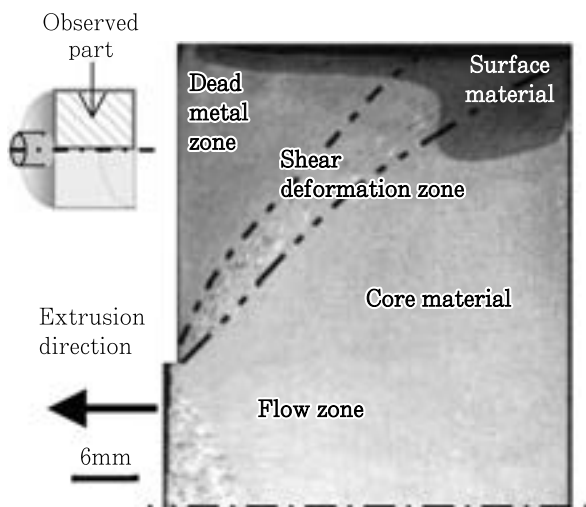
Macrostructure in axial section of billet remainder in 38mm long in direct extrusion.
